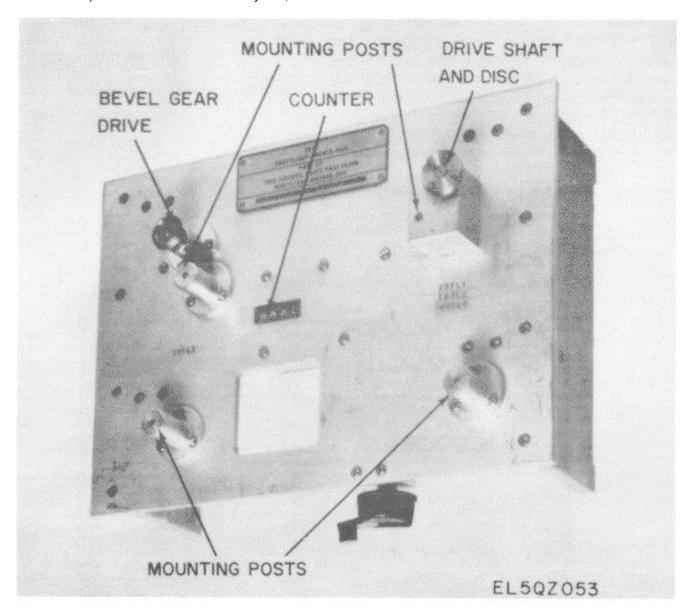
Bandpass Filter Test Fixture TS-3&8/GRM-95(V2.
